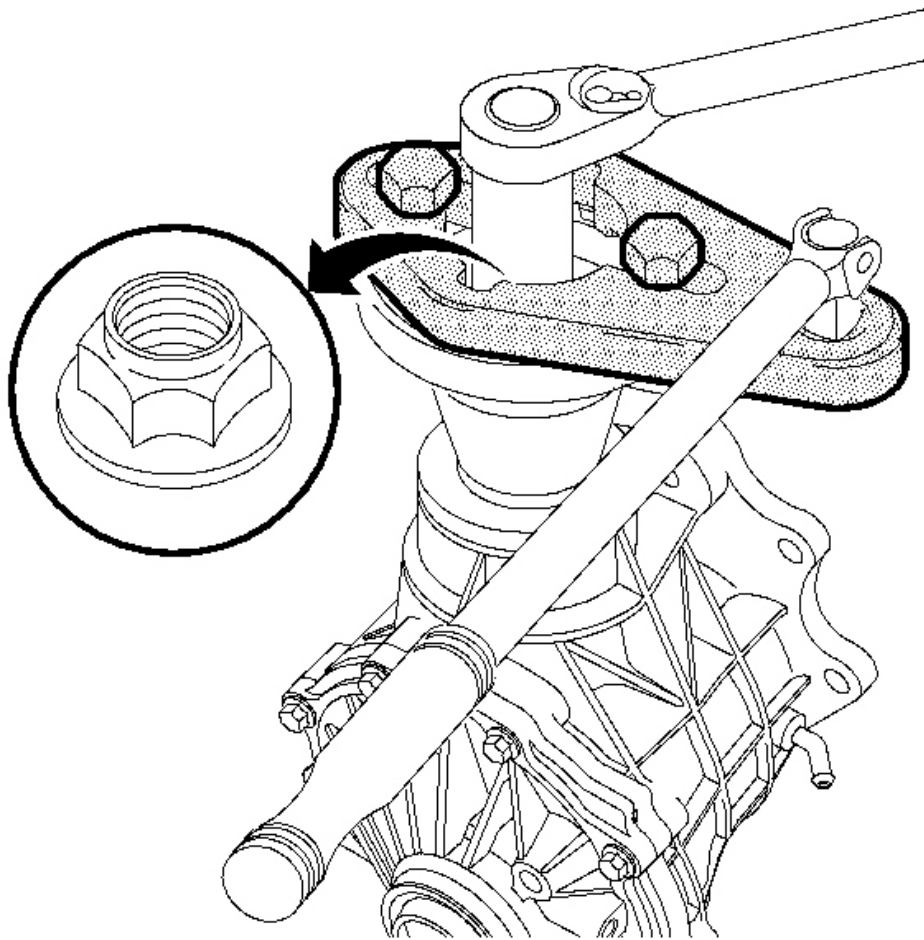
Removing Pinion Nut Using Breaker Bar & Ratchet 27 mm Socket
